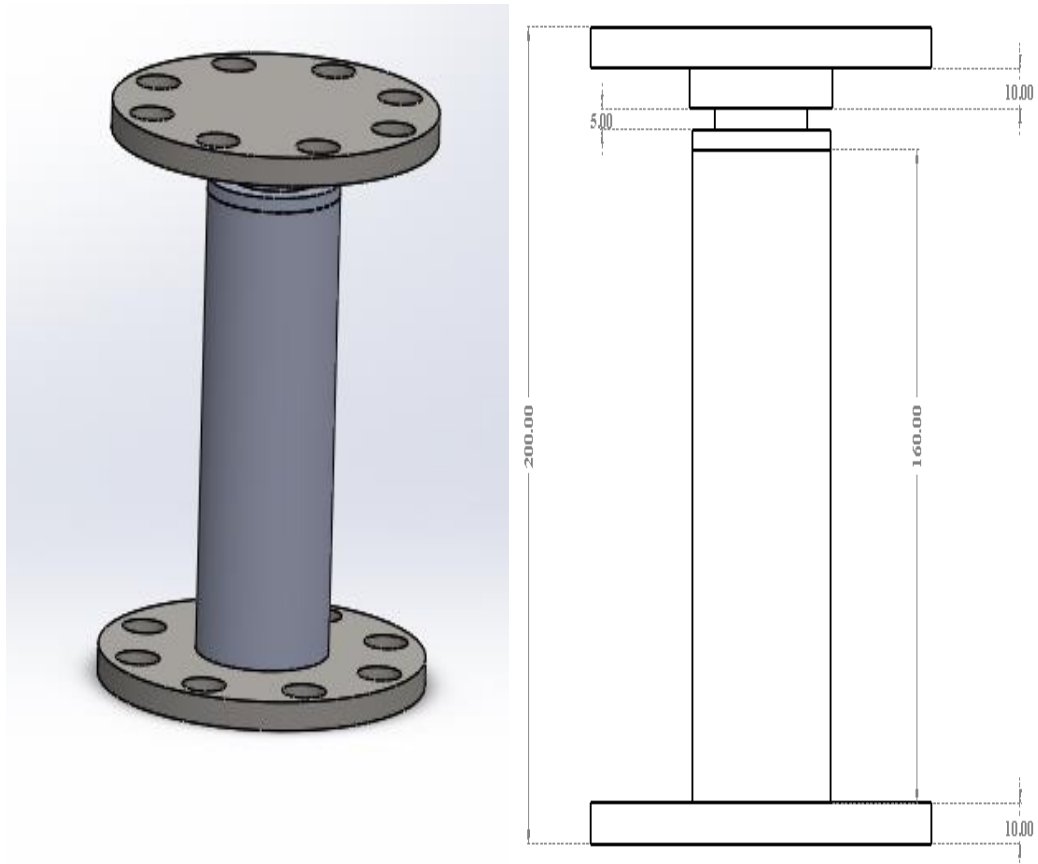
2: Telescopic shaft 3D model and its dimension at idle position
